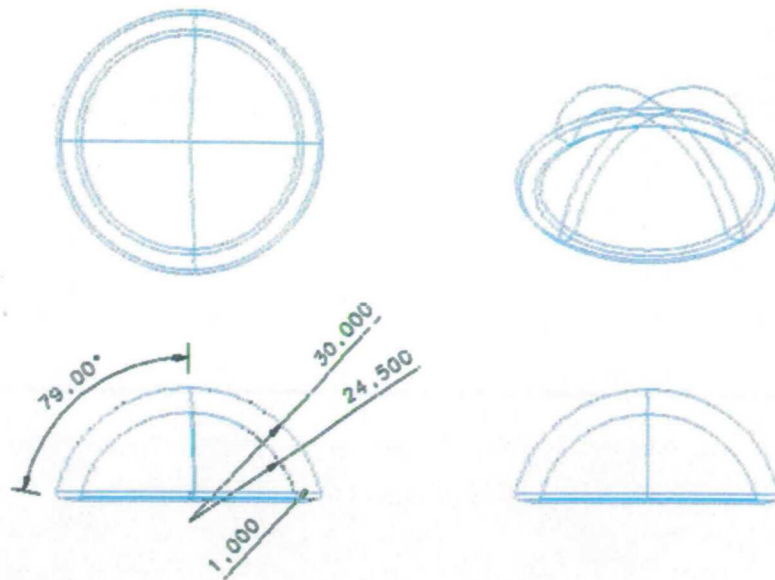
Acetabular component drawing (dimensions in mm).
